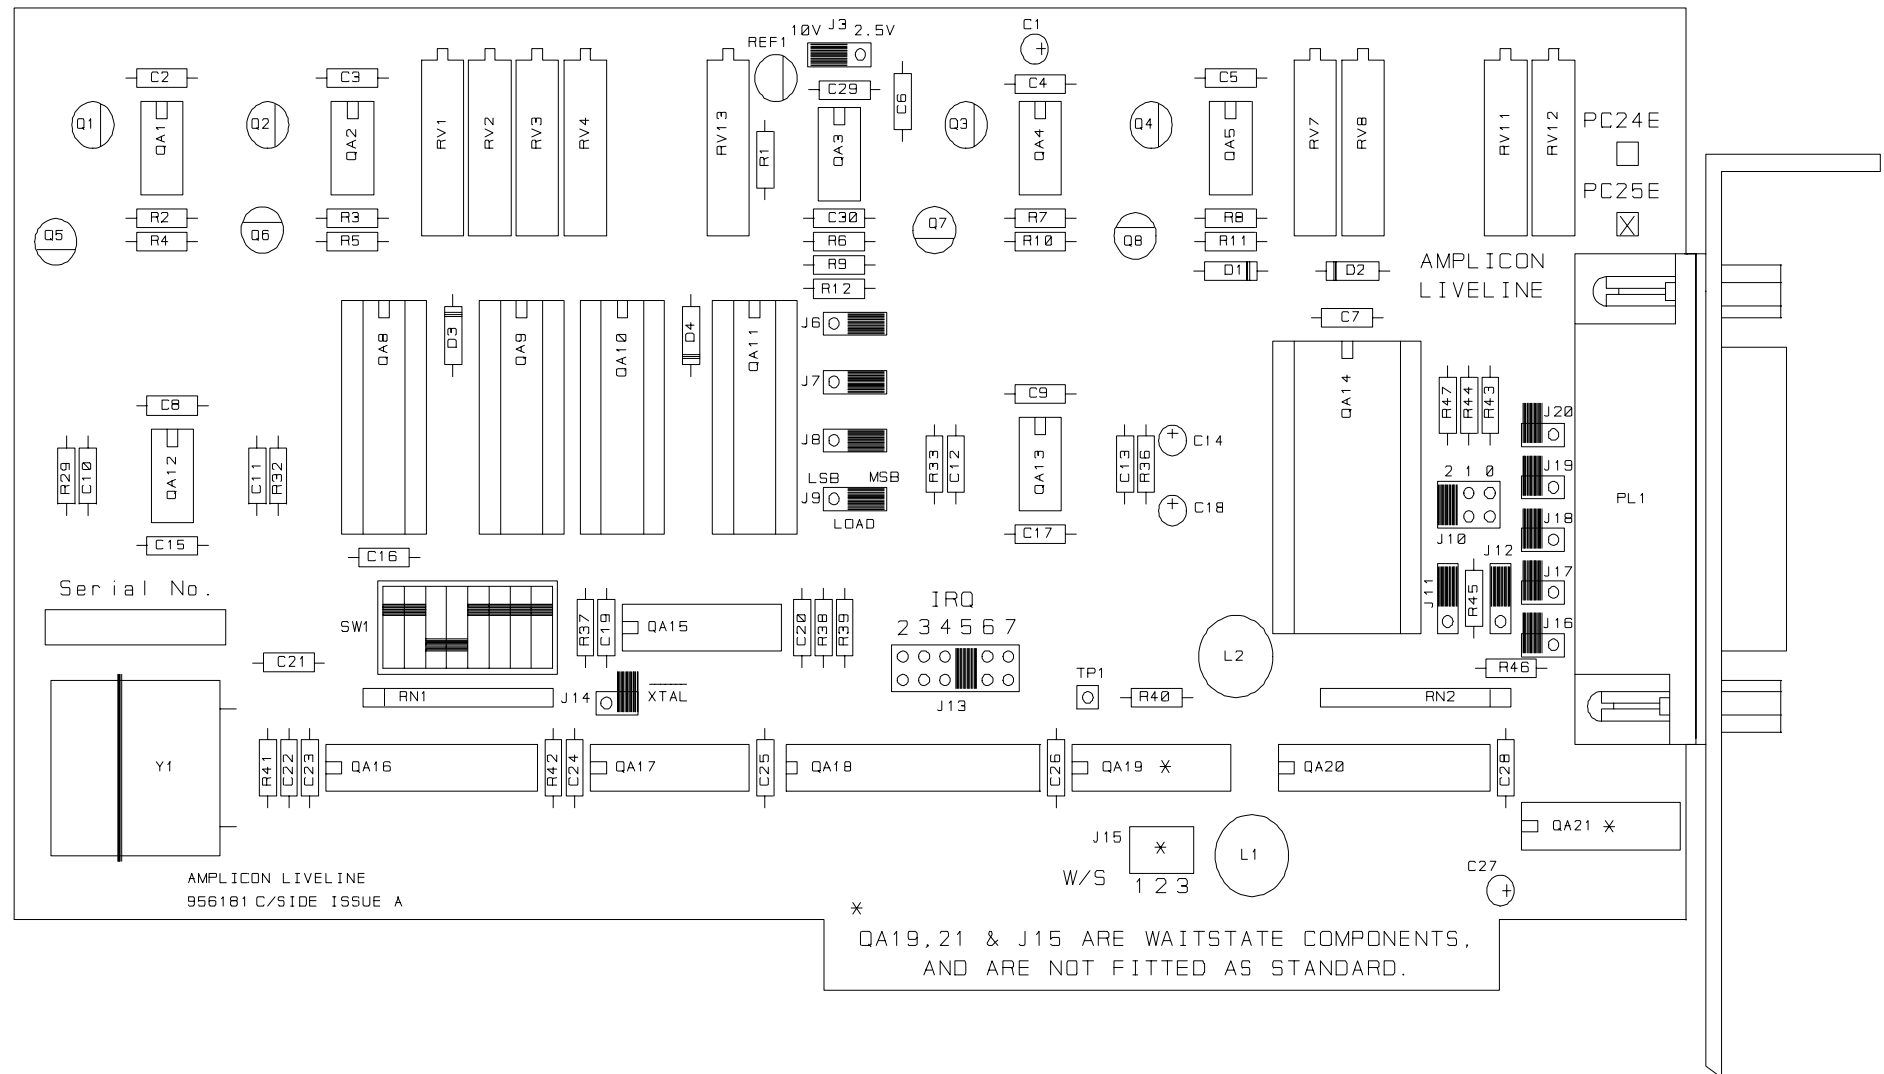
PC25E PRINTED CIRCUIT BOARD LAYOUT
